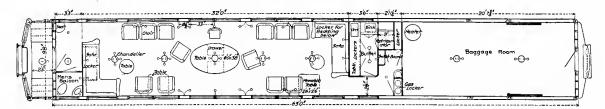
Floor Plan of Chicago Great Western Combination Baggage and Buffet-Smoking Car.
